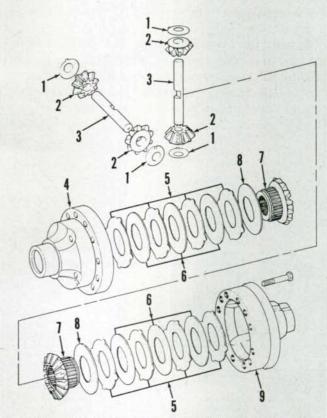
Exploded view of limited slip differential assembly used in APL-3054 type axle.
